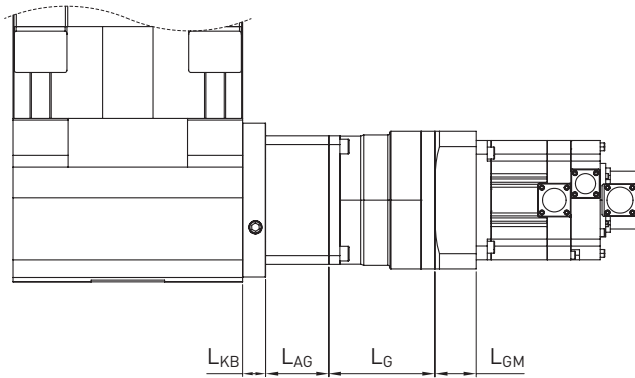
Motor connection of bridge axis HB-B with gearbox
